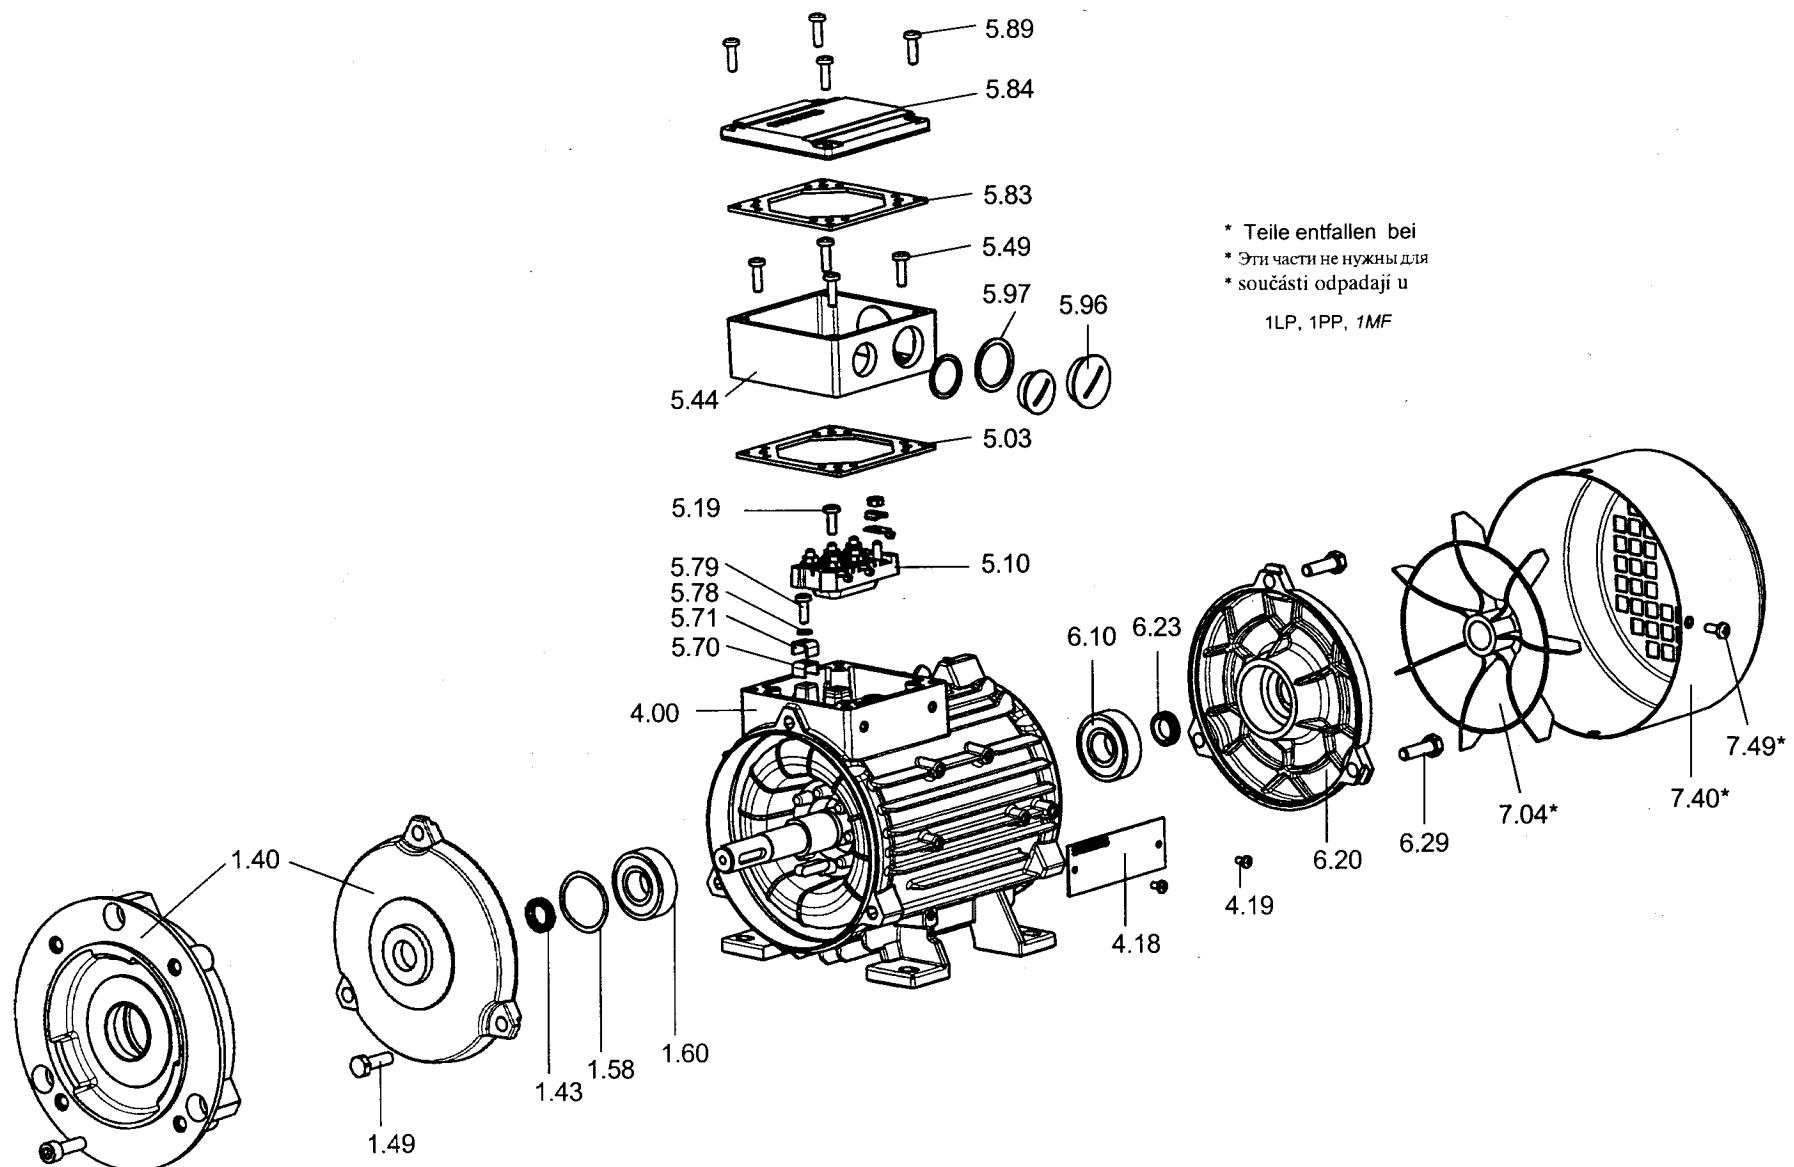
/ Рис. 2 / obr. 2 BG 56 ... 90L
